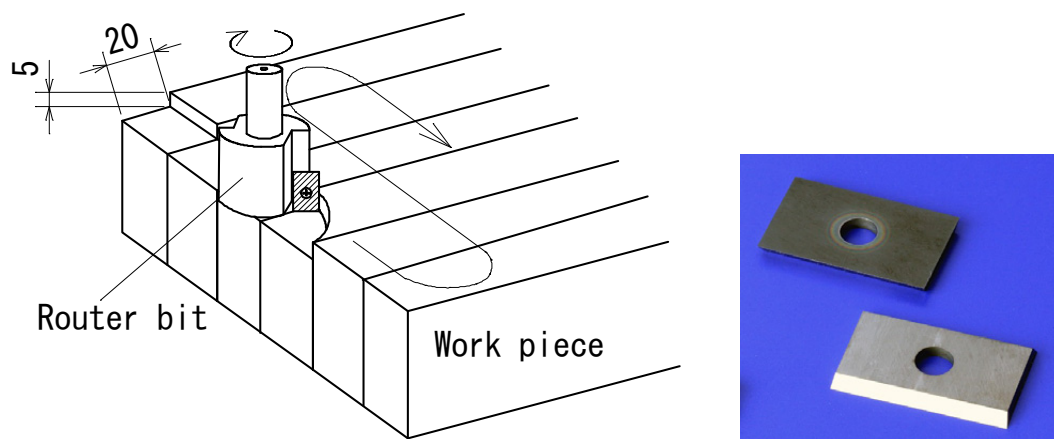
Schematic drawing of the endurance cutting test using router bit with carbide inserts, and a photograph of the coated carbide inserts.
